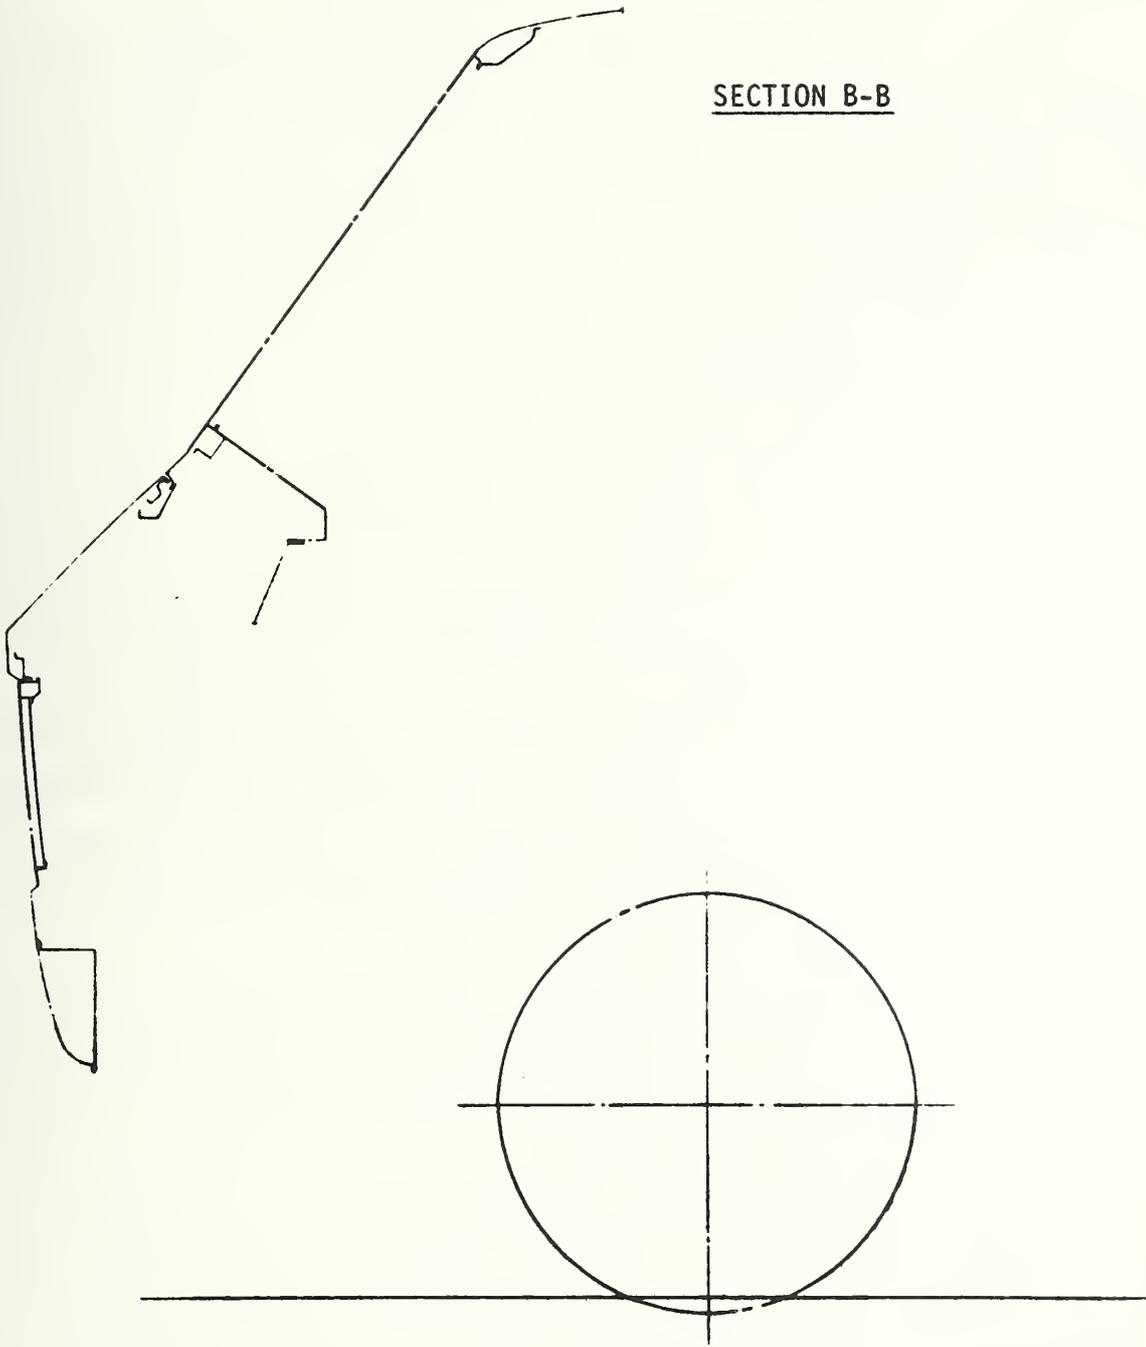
F. ICD SOLUTION 1 FRONT END SHEET METAL LAYOUT
